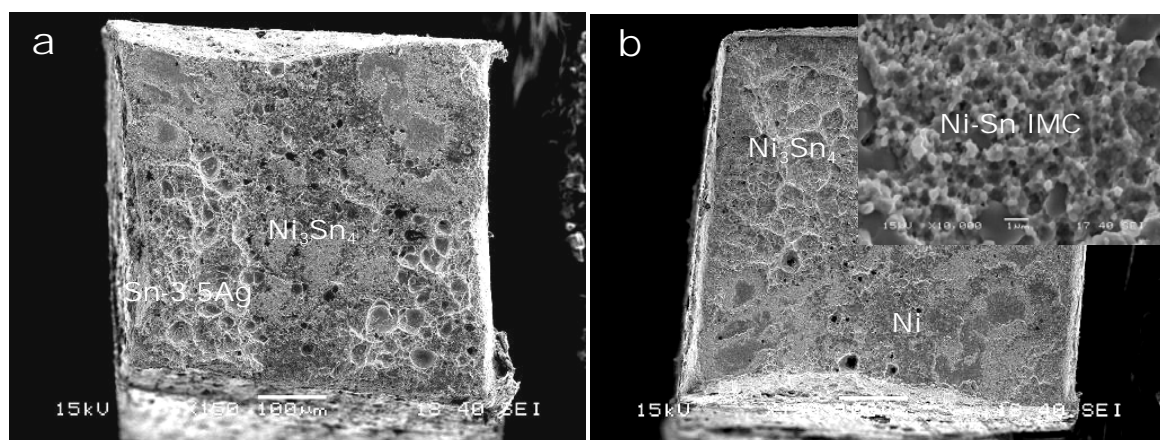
Fracture surfaces of the Ni/Sn-3.5Ag solder joint aged at 160 °C for 100 h without current: (a) solder side and (b) Ni side. Brittle fracture occurred at the mixed Sn-3.5Ag/Ni₃Sn₄, Ni-Sn IMC/Ni-Sn IMC, and Ni-Sn IMC/Ni interfaces.
